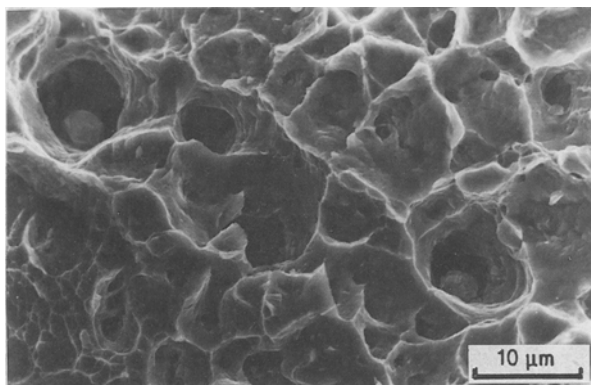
SEM micrograph of fractured surface of tensile tested weld metal A.
